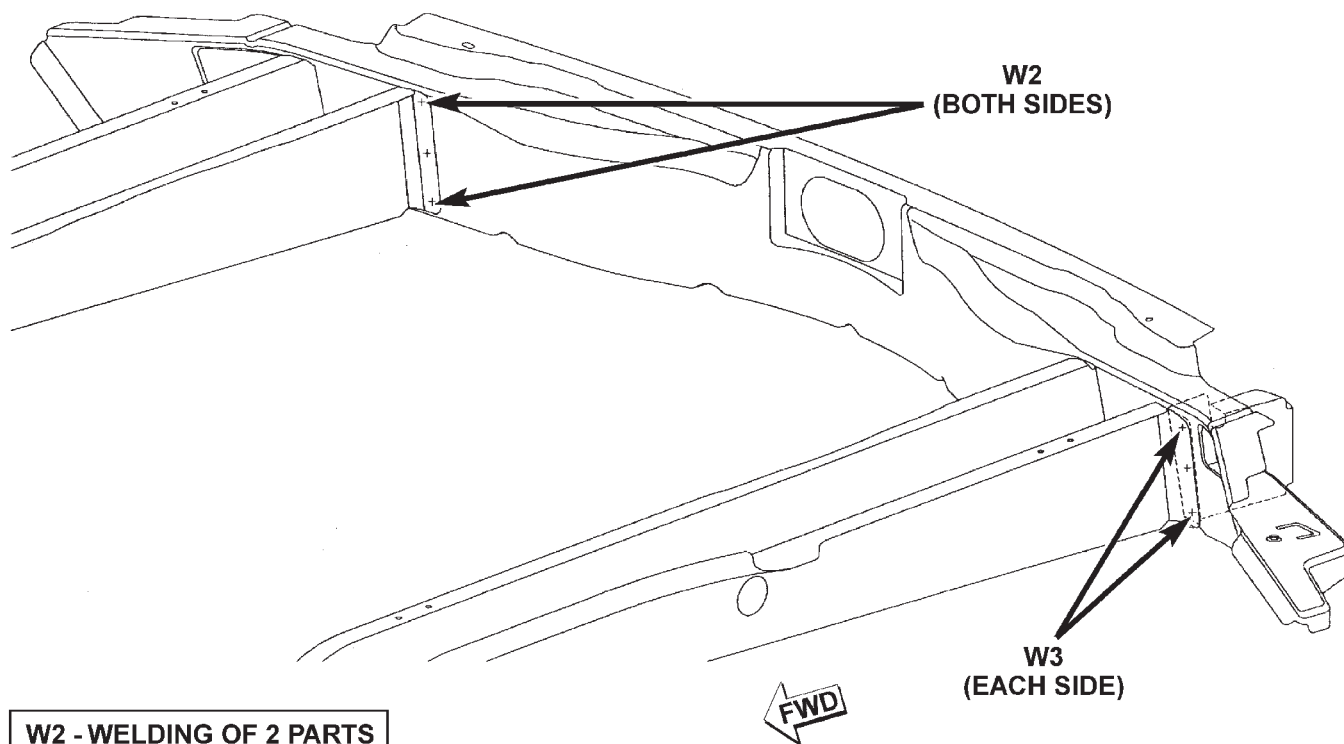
OUTER TRANSMISSION CROSSMEMBER REINFORCEMENT TO RAIL AND BODYSIDE SILL
